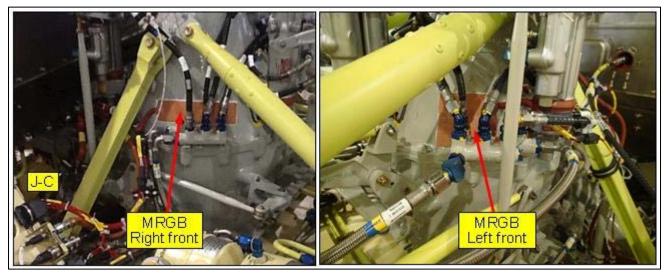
Main rotor gearbox front Pad Heat Elements:
